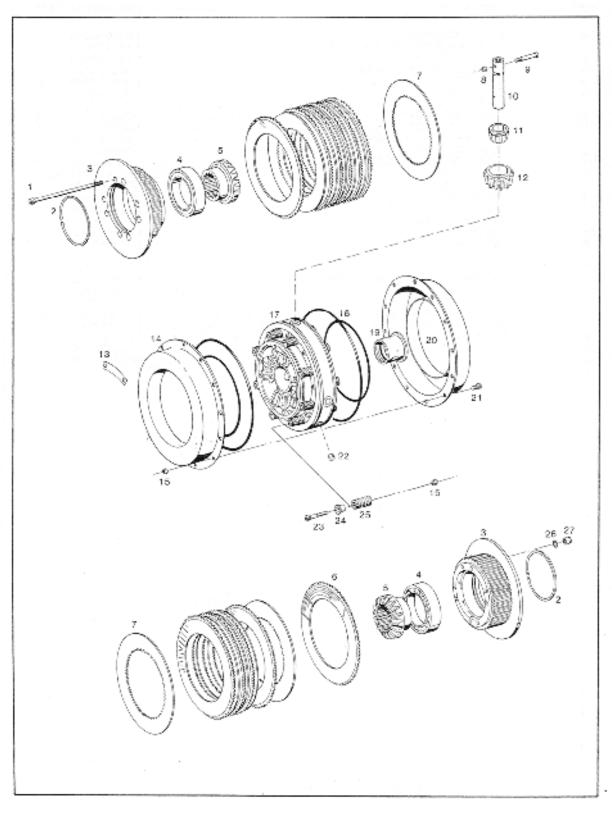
'HP'-28000 Clutch and Gear Carrier Assembly
